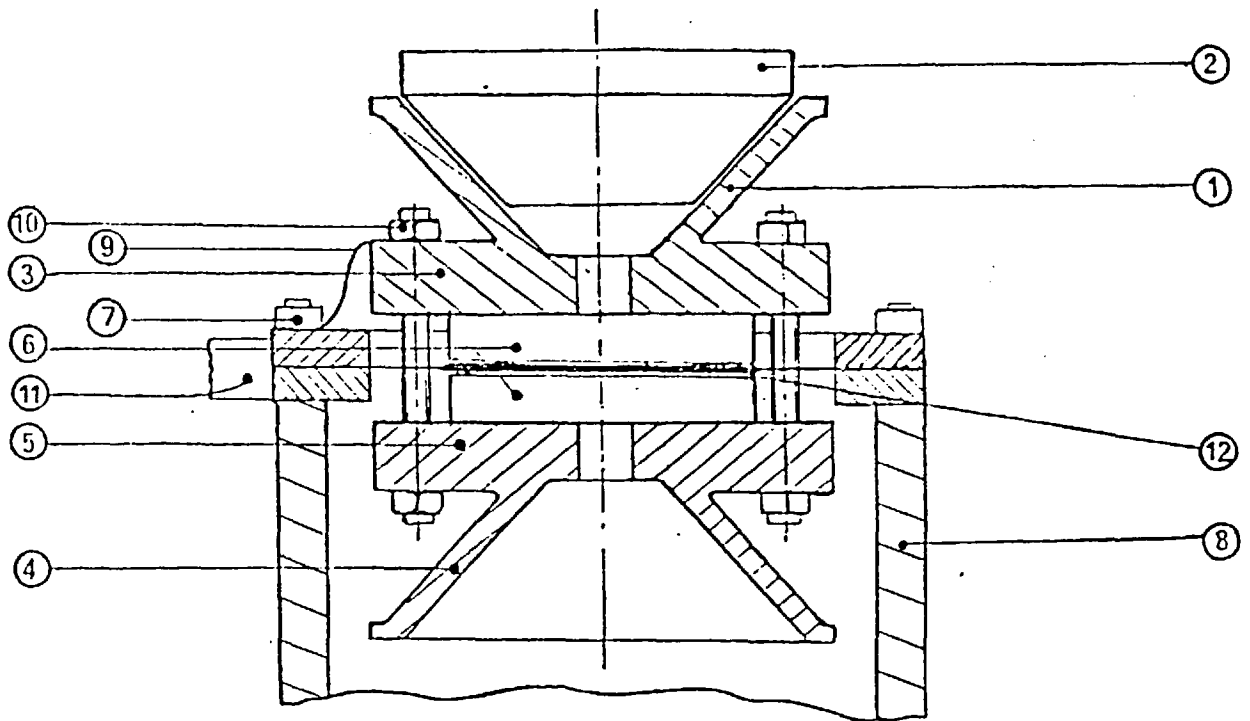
Admiralty (A.C.O.) conical S.F. bearing model as used in test.
